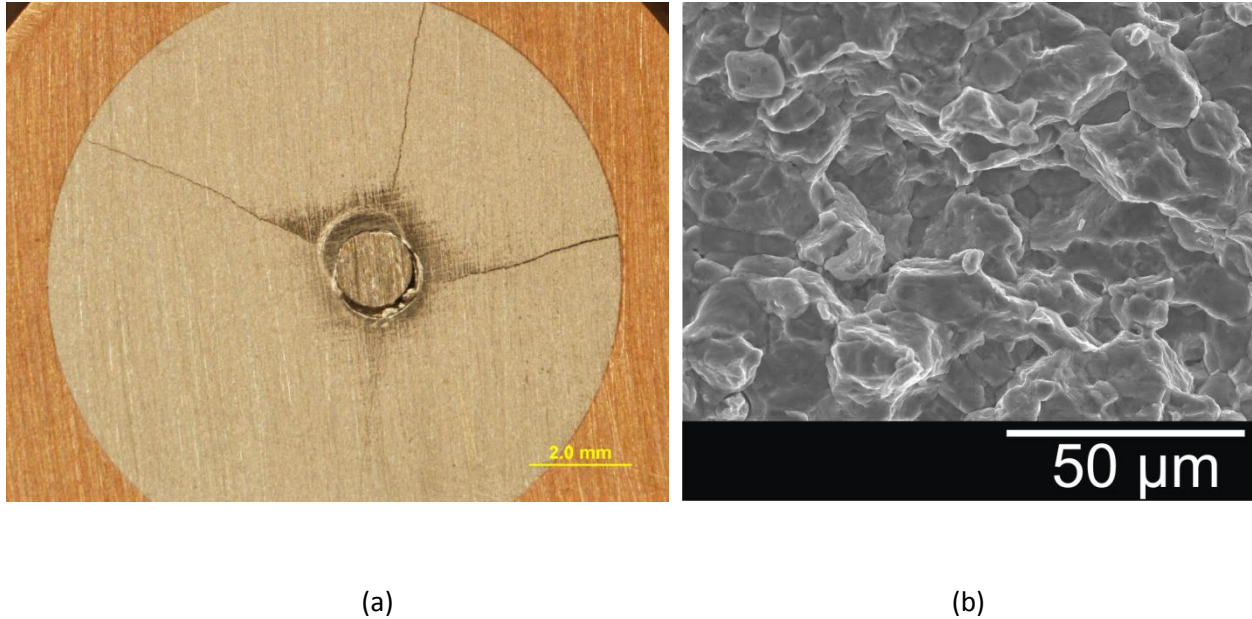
(a) Fractured multi-dimensional compaction sample (1.5 GPa with 0 revolution process condition) after micro shear punch test and (b) Fractography image of the same sample after an overloading fracture.
